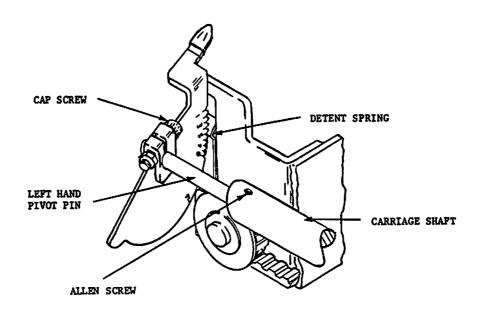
HEAD ADJUSTMENT ARM ASSEMBLY
